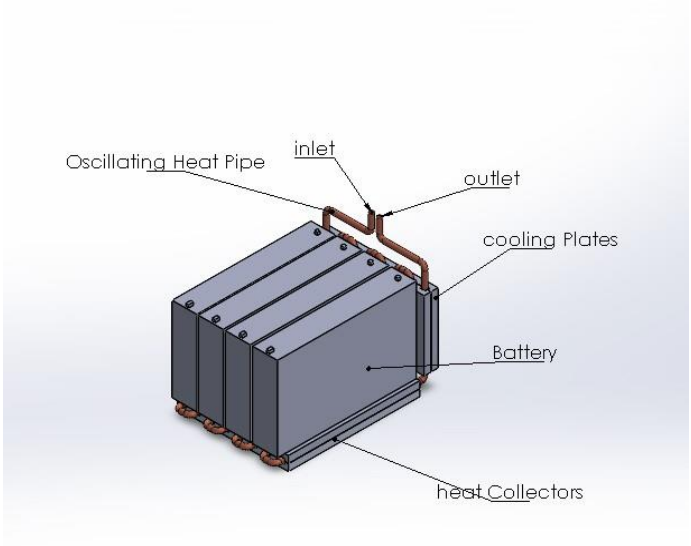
SolidWorks assembly showing the OHP integration with battery modules.
